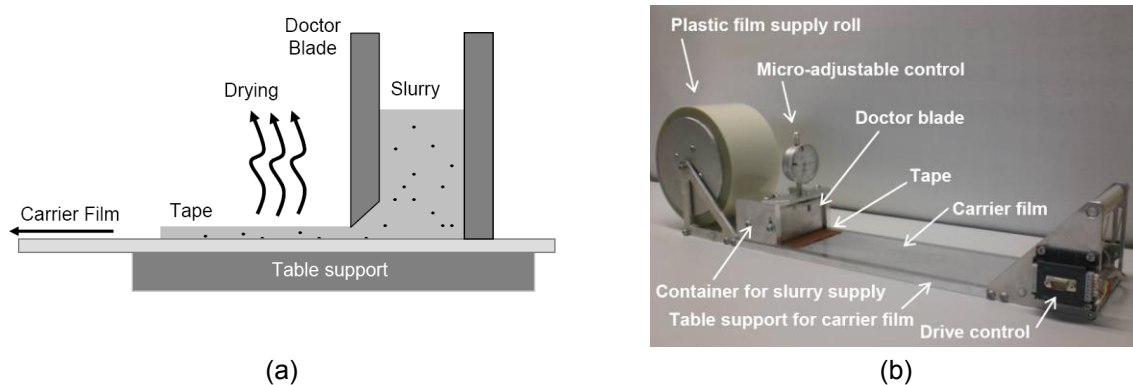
Principle of tape casting (a) and experimental set-up (b)
